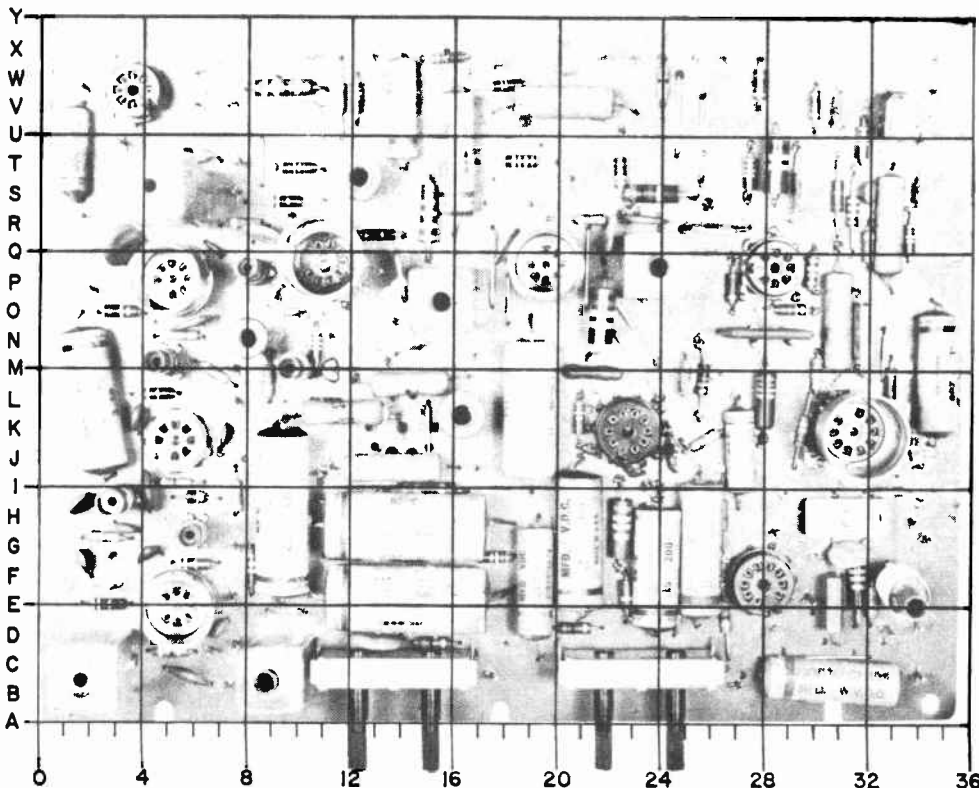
Top view of printed circuit board. Guide to location of resistors, capacitors, coils, and transformers when used with the chart.
